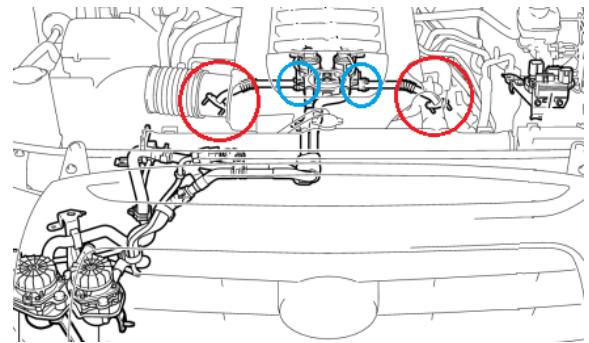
5.7L Air Tubes from Exhaust Valves to Exhaust Manifold Air Tubes
